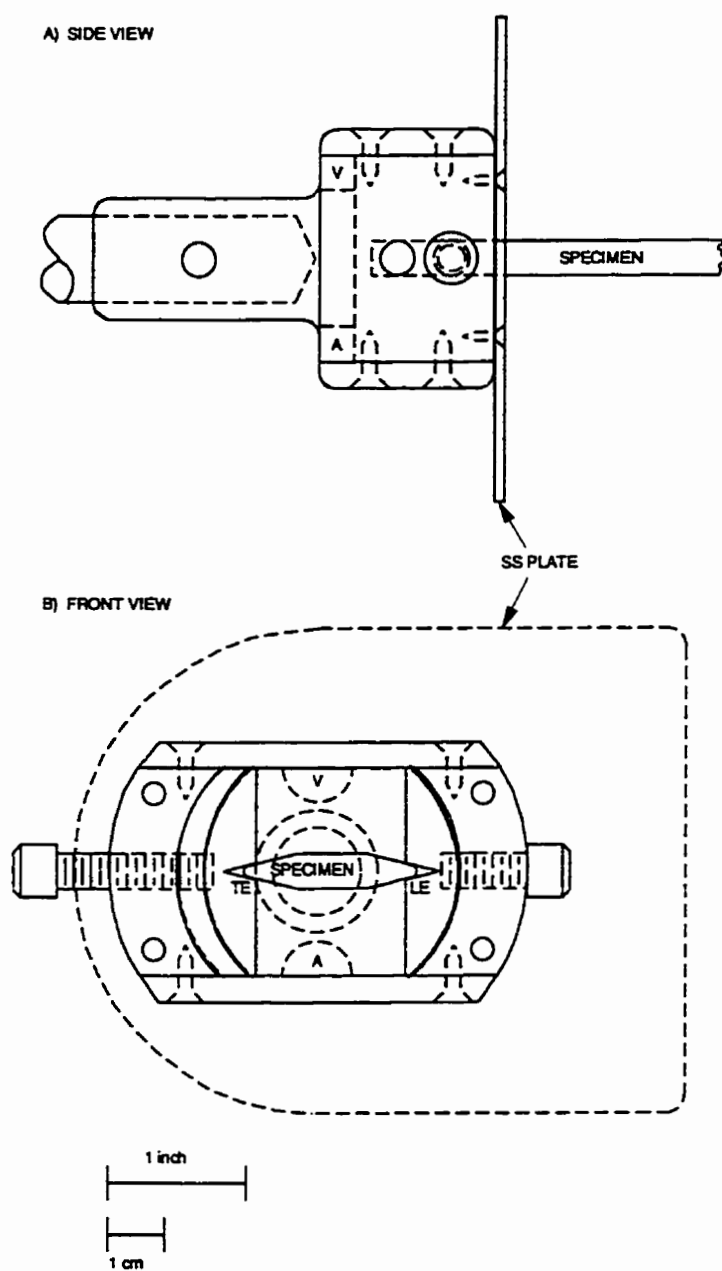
Design of the specimen holder which is fixed to the pneumatic carrier in the burner rig (V = hole for the passage of the PD probes; A = hole for the passage of the AC probes).
